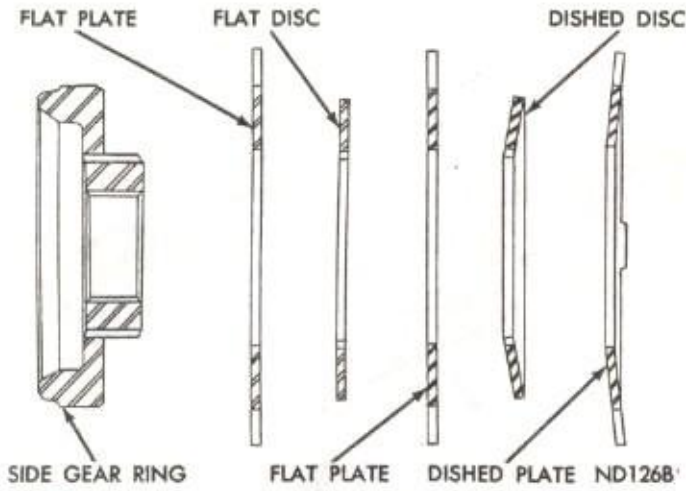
Arrangement of Plates and Discs (9 1/4" Differential)
